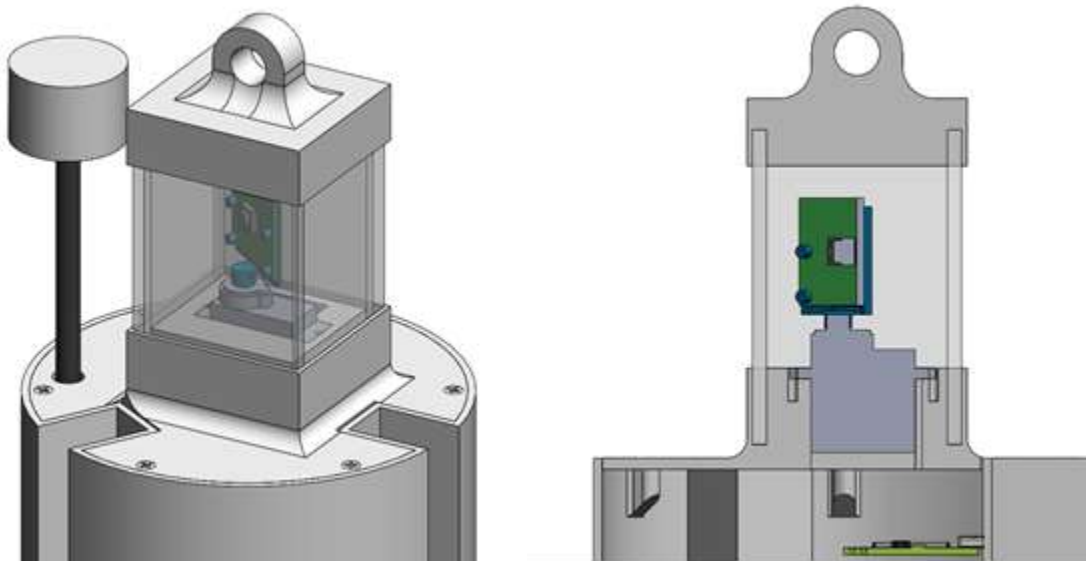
Payload Central Column (left) and Cross-Section of Central Column (right)
